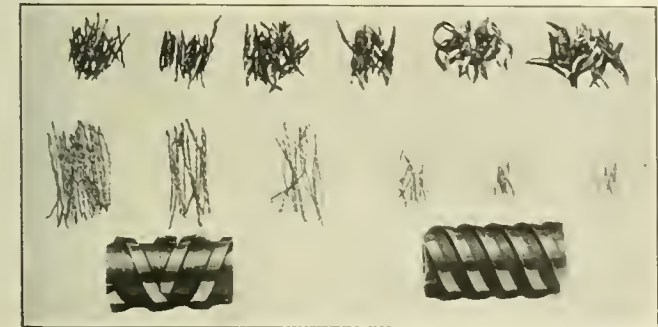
Helical Cutters, Single and Interlocked, and Chips produced by them
